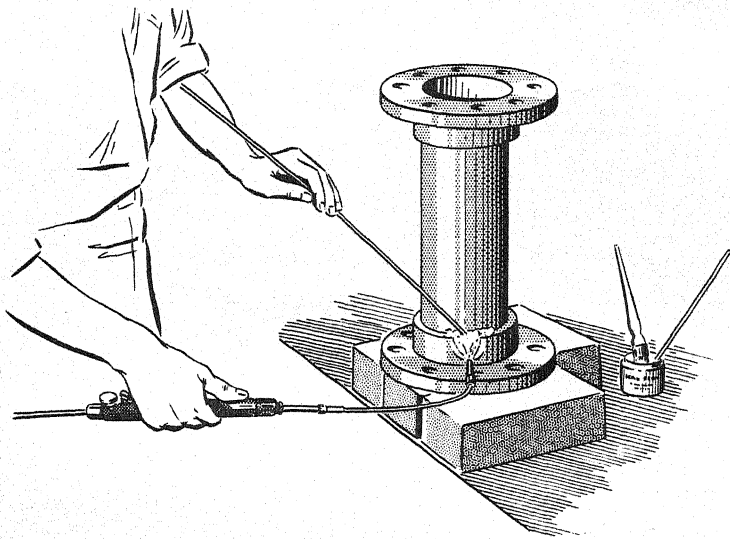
Feed-in method. Notice torch flame directed on flange hub while alloy is added into clearance gap.
